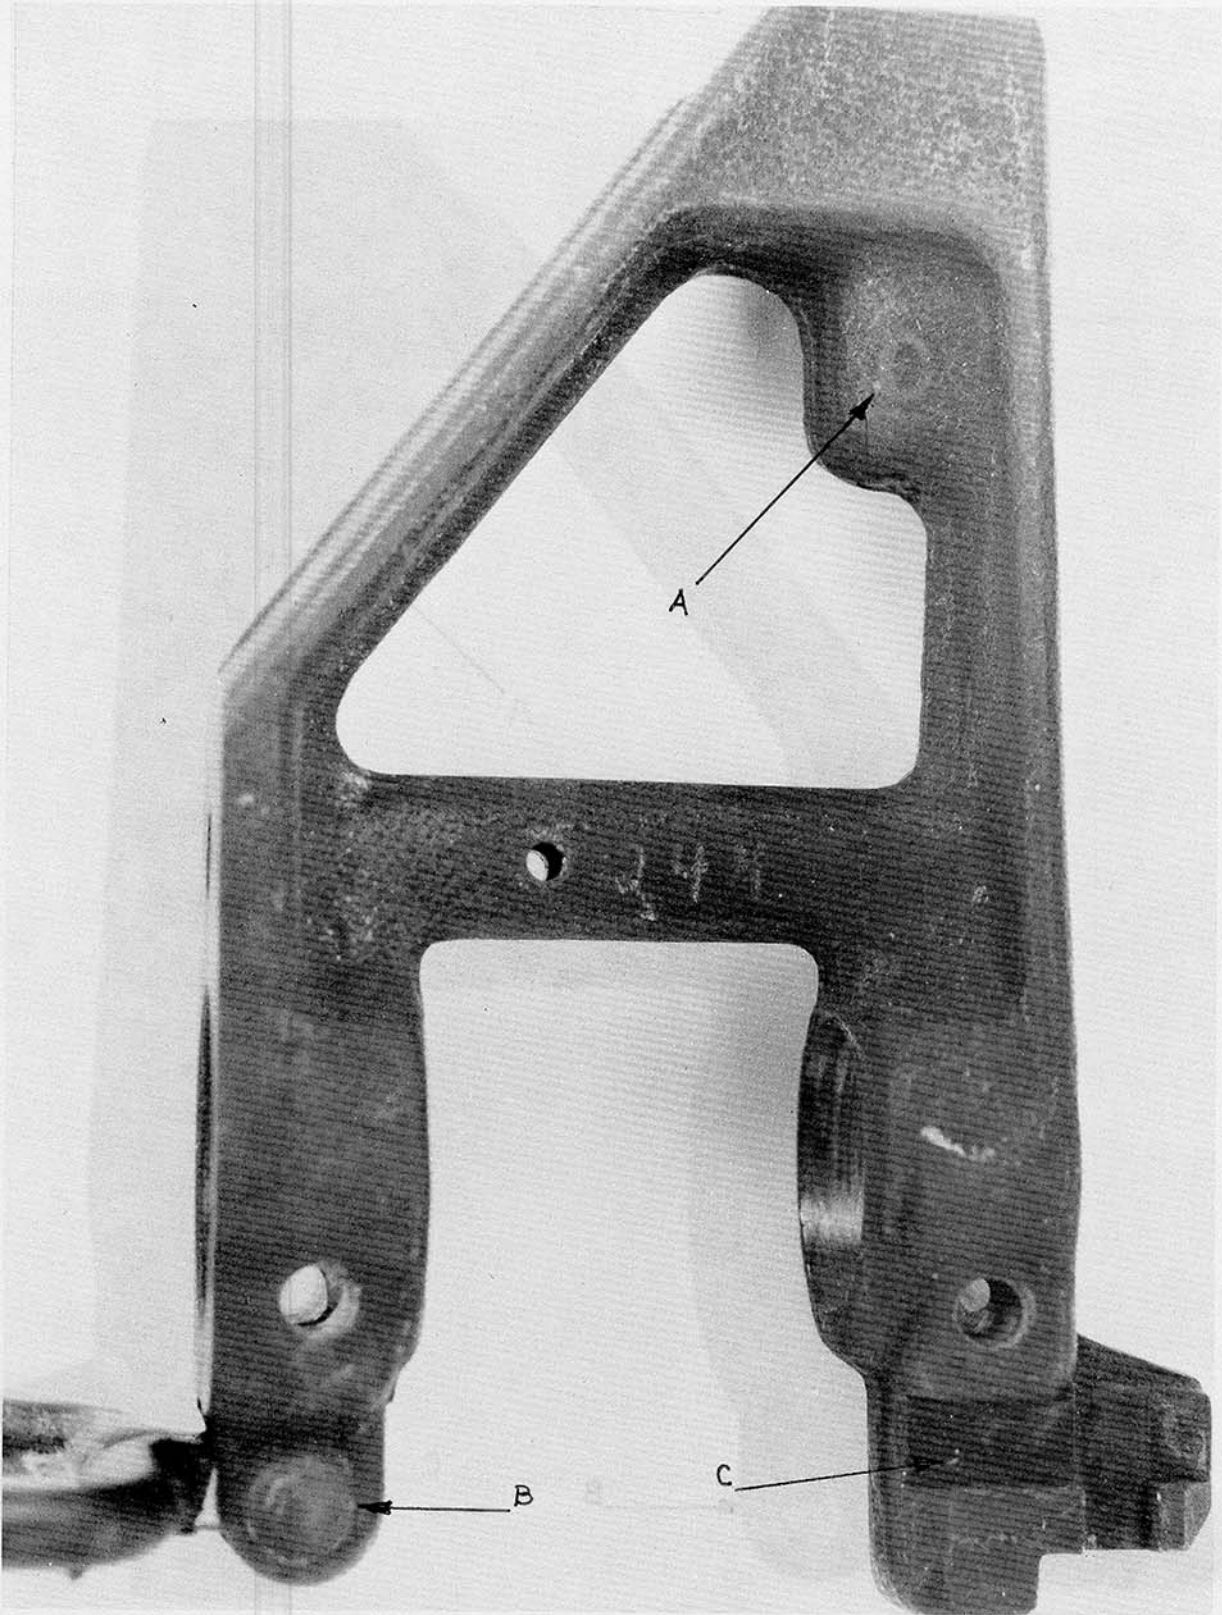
Right side view of front sight from Colt produced M16A1 rifle SN 6418244.
